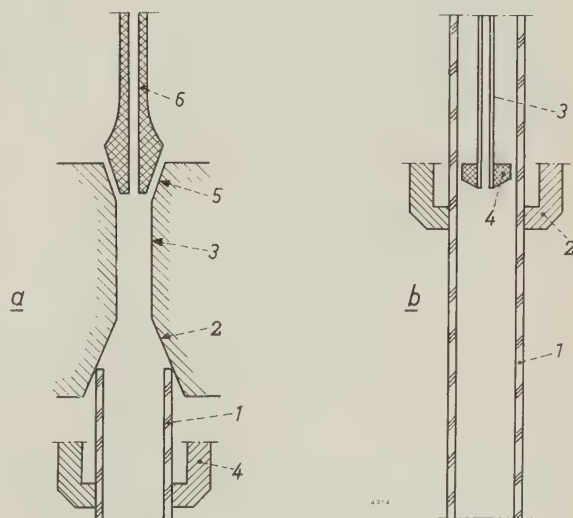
Air feed for blowing the bulb in a glass-tubing machine. a) Method of feed in machines working short pieces of tubing. 1 top of glass tubing, pressed firmly into the flared bottom end 2 of the bushing 3 which, together with the clamp 4, forms part of a chuck. 5 flared top end of bushing. 6 air line inserted in 3 out allowing for some air leakage. b) Air feed system in machines for working long sections of tubing. 1 glass tubing. 2 clamp of chuck. 3 air duct with collar 4. Between this collar and the inside wall of the tube a gap is again provided to allow for air leakage.
